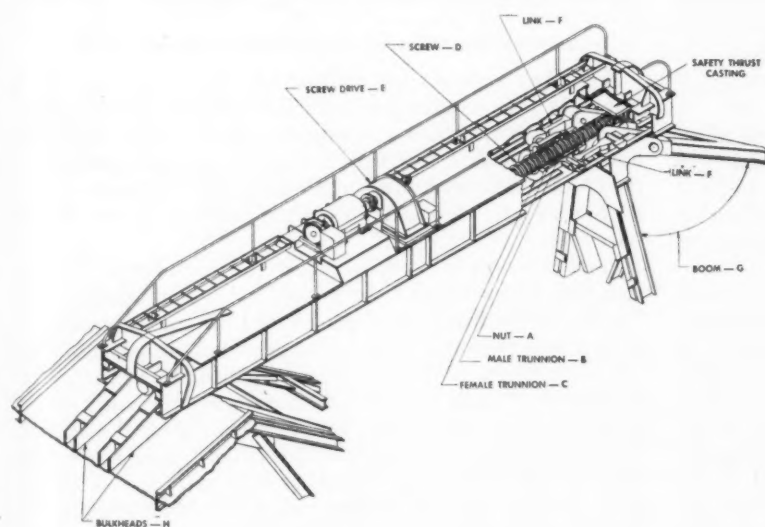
ISOMETRIC DRAWING OF A SINGLE-SCREW UNIT
